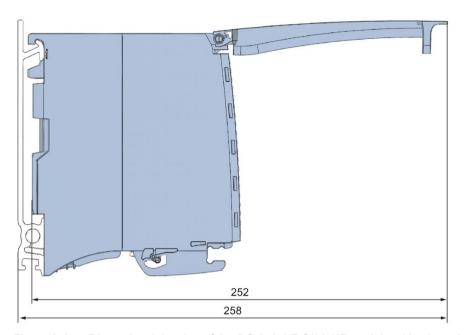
Dimensional drawing of the DQ 8x24VDC/2A HF module, side view with open front cover
